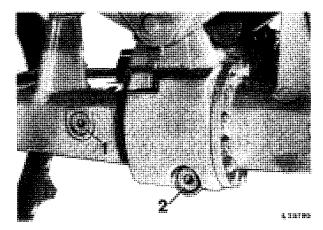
Axle Housing (from Serial No. 450 000 L)
